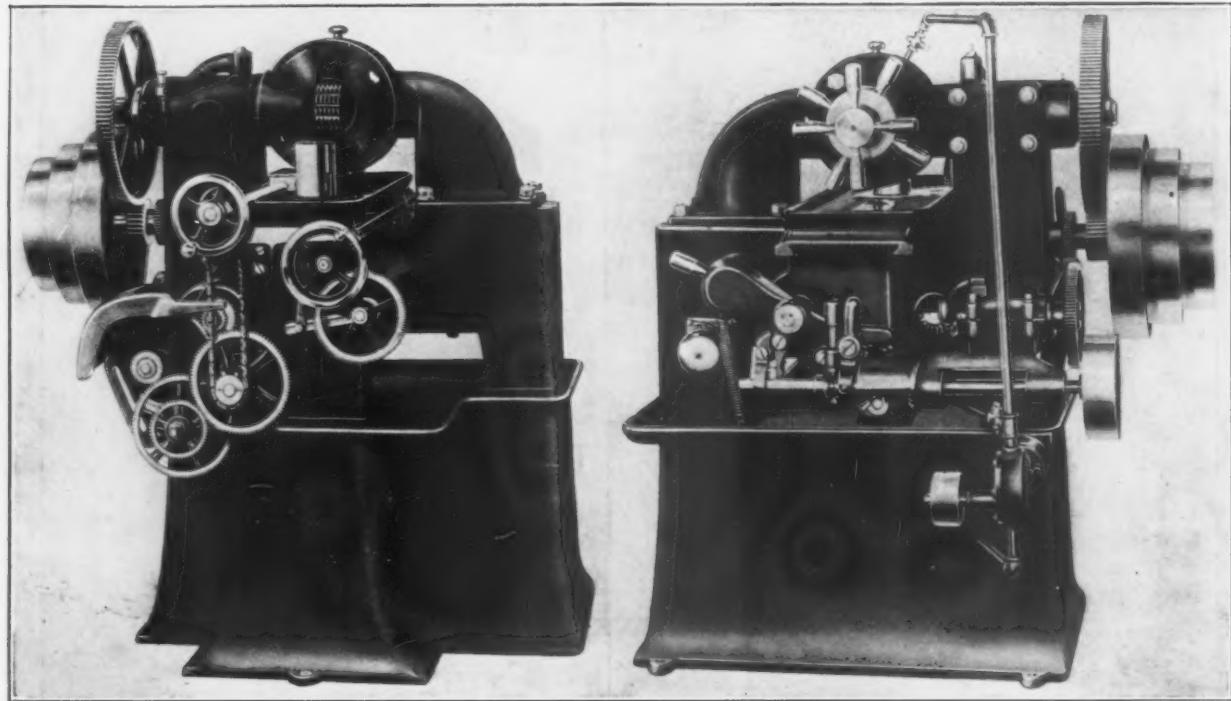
Front and Rear Views of the Automatic Gear Cutter Built by the Grant-Lees Machine Company, Cleveland, Ohio.
